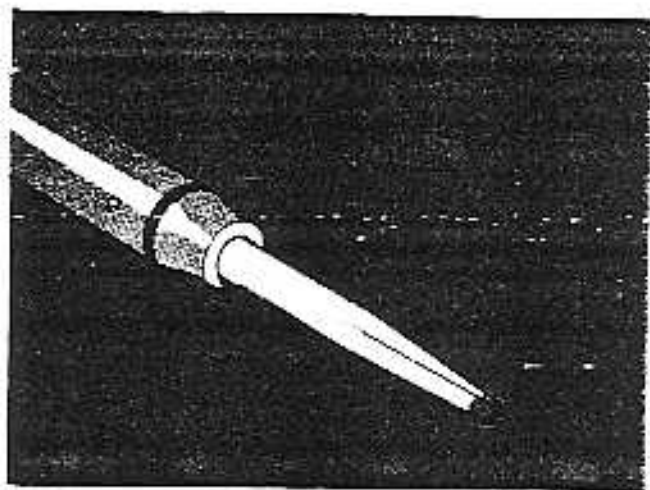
Soldering iron tip properly shaped and tinned.
